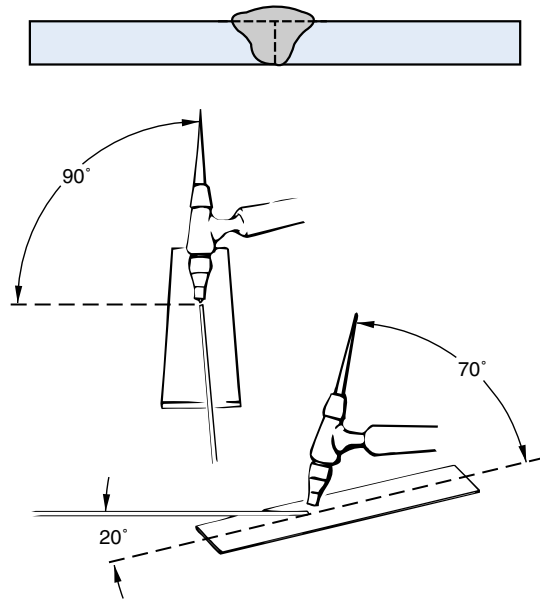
Welding the butt weld and stringer bead.
